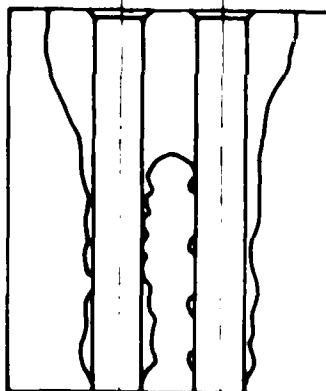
(ii) FRACTURES TYPE (iii) SPECIMENS. DRILLED 3.3 mm, OPEN HOLES
